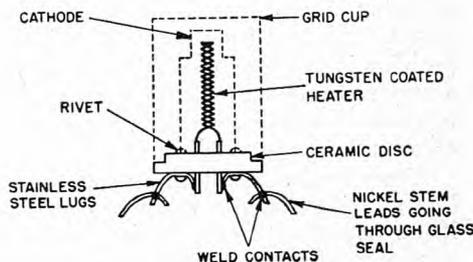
In Du Mont cathode-ray tubes, the heater "feet" are welded to stainless steel lugs that are riveted to a ceramic disc. The heater is accurately positioned on the disc by the location of the rivets and the position of the lugs
